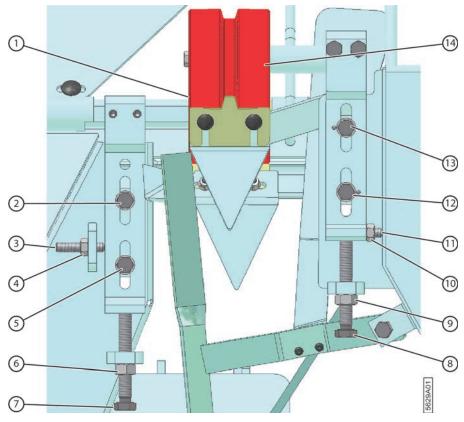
Adjusting the tension of the lowermost outermost picking belt
